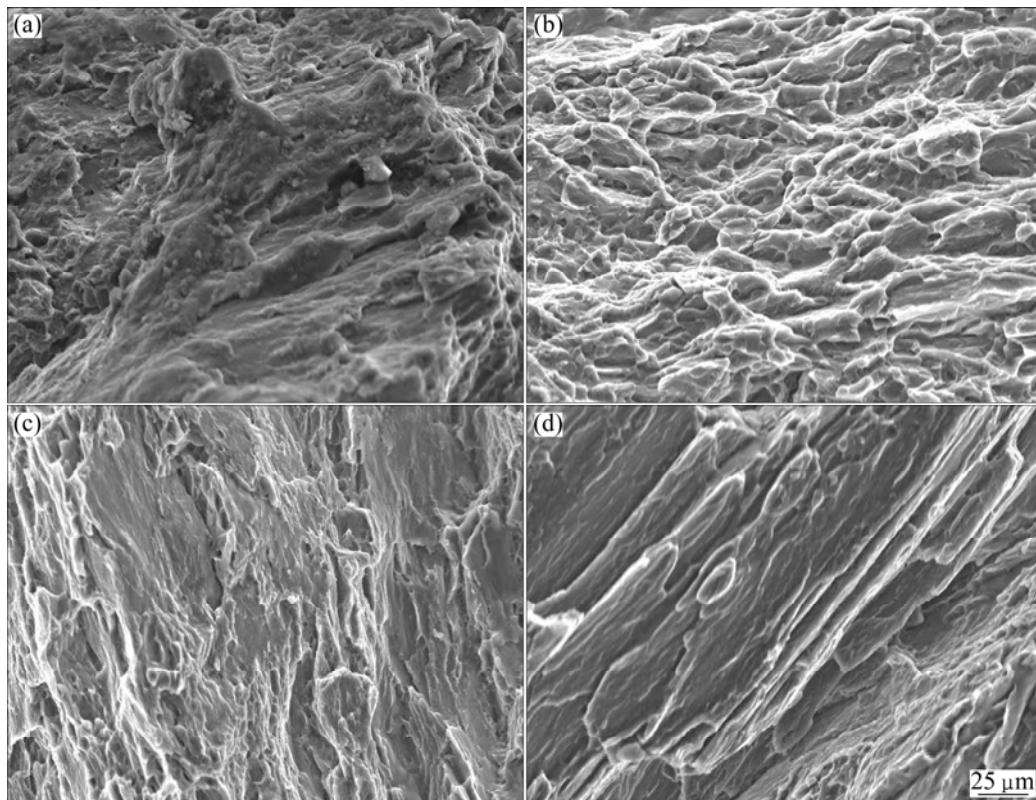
shows the SEM fractographs of the smooth tensile specimens after tensile test. It is observed that the fractured surface of the specimen at optimum welding speed (135 mm/min) contained a large population of fine and shallow dimples, which is an indication of relatively higher tensile strength and ductility. The other specimens failed in quasi cleavage mode.
